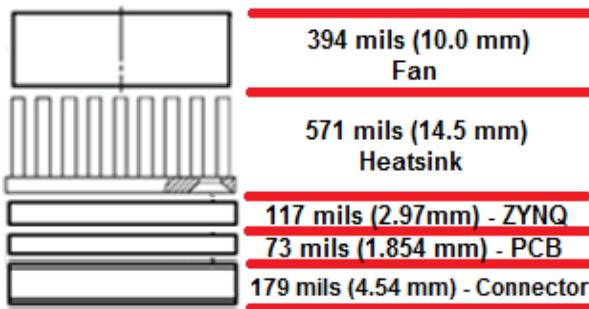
UltraZed-EV SOM Side View Mechanical Dimensions
